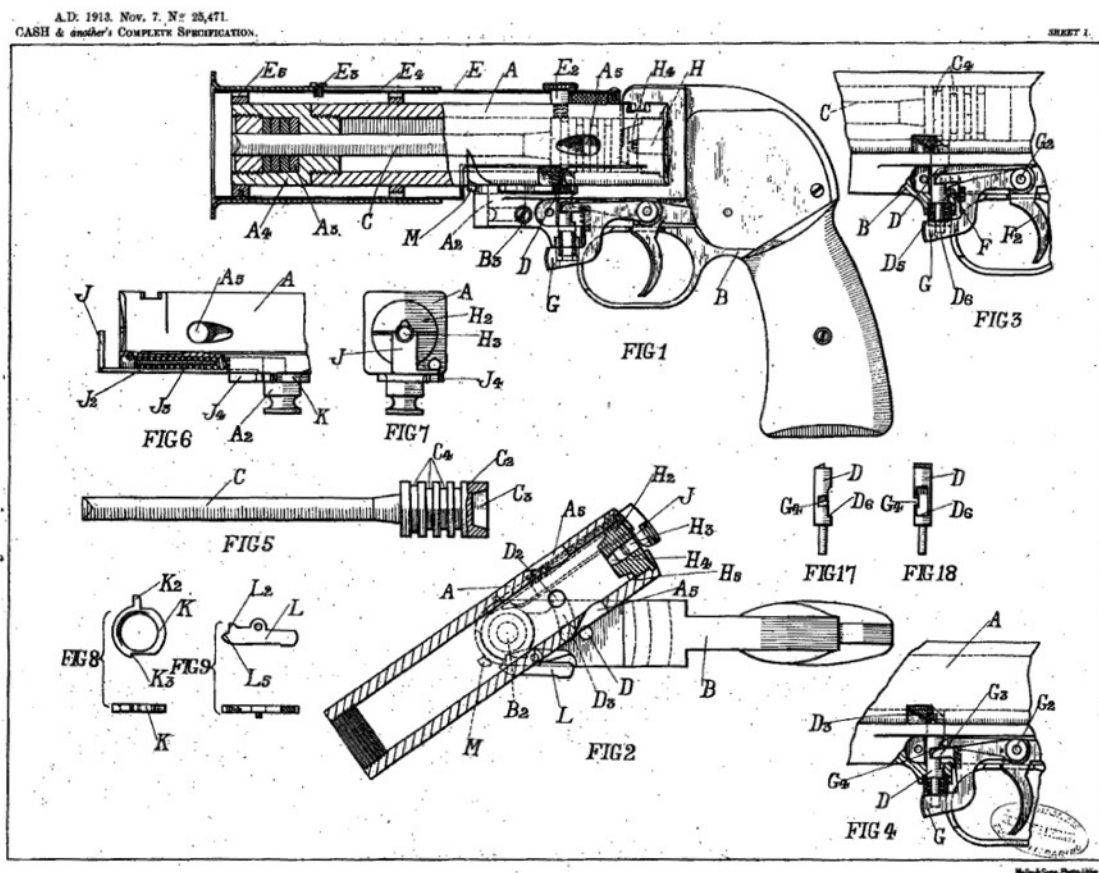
Original 1913 patent drawing (25471) for the CASH RSPCA captive bolt pistol
